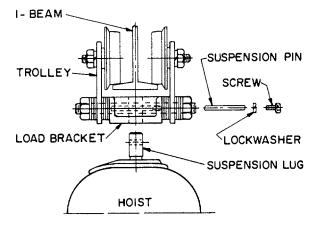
ATTACHING HOIST TO TROLLEY.
